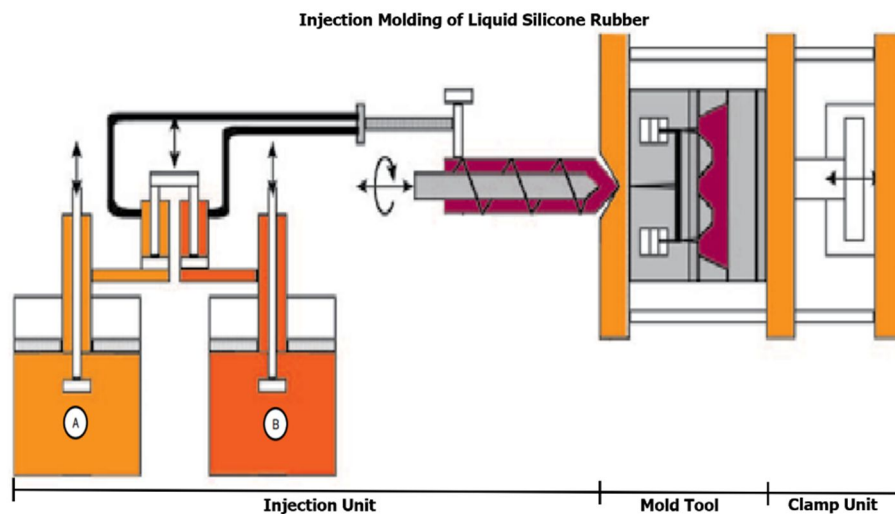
A schematic of an injection molding machine for liquid silicone rubber. Adapted from [24].
